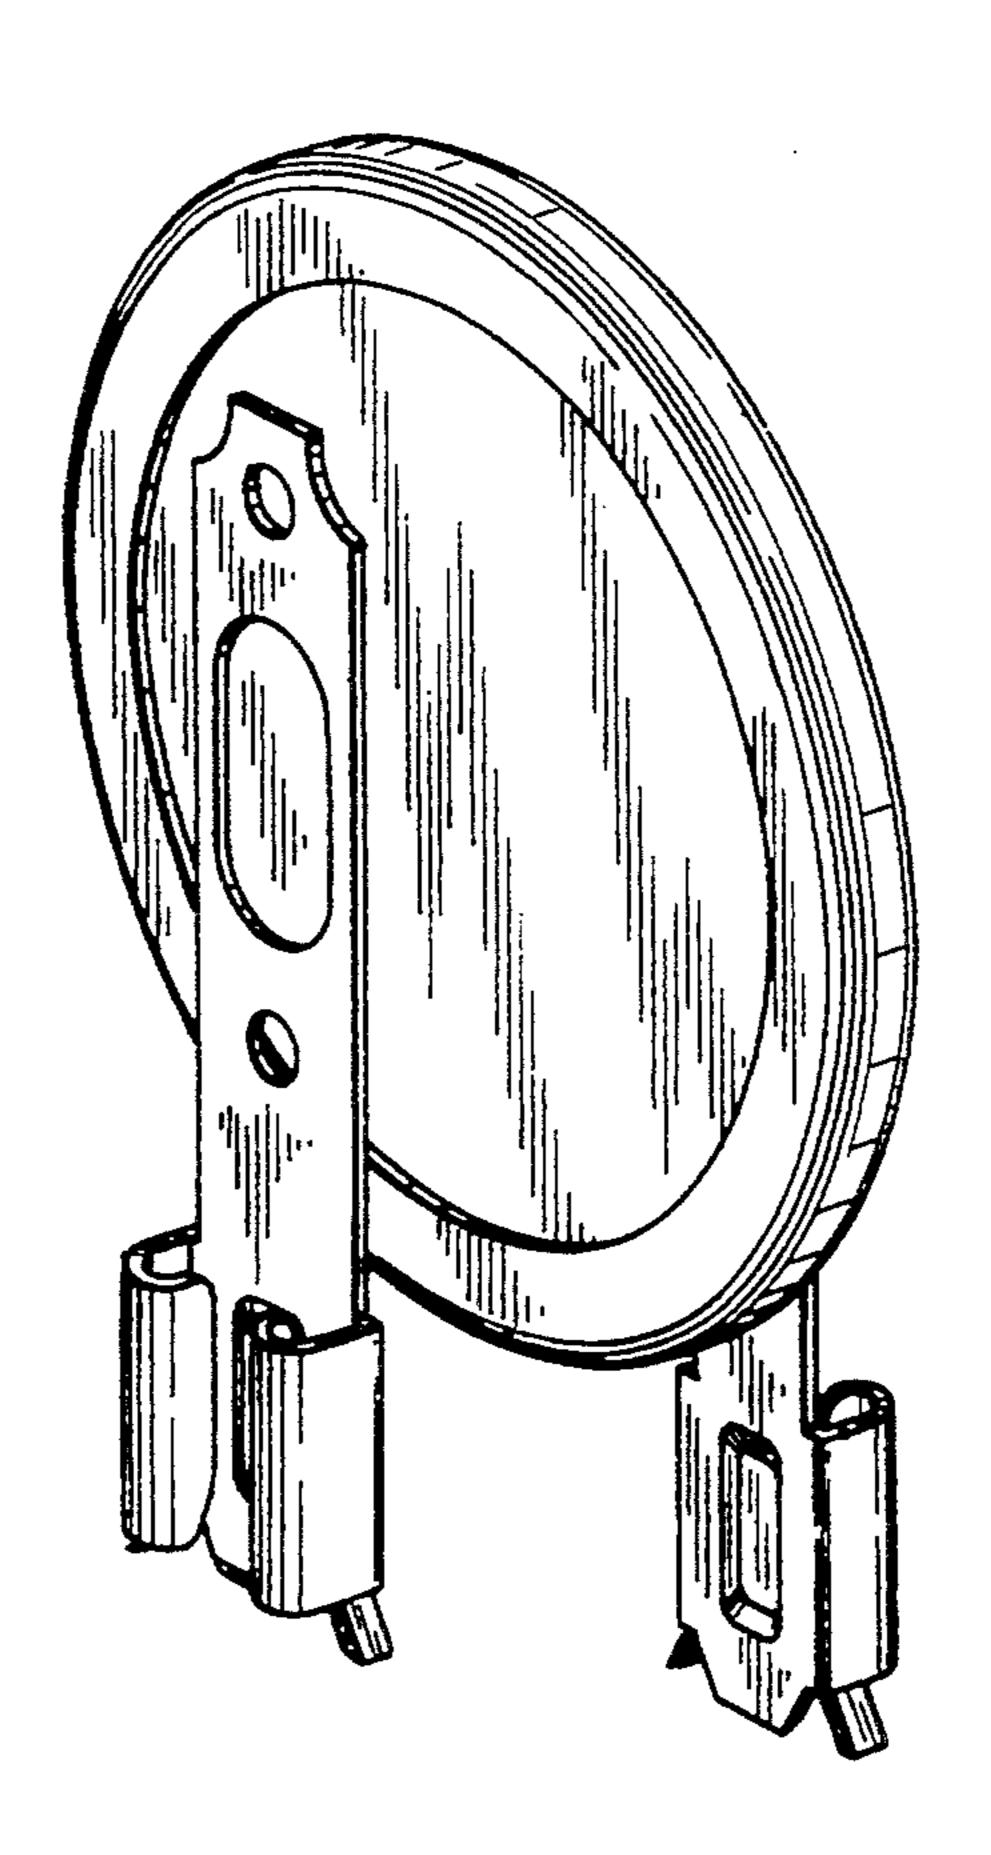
is a perspective view of the front, one end and one side of a battery with terminal showing our design; FIG. 2 is a front elevational view thereof;
